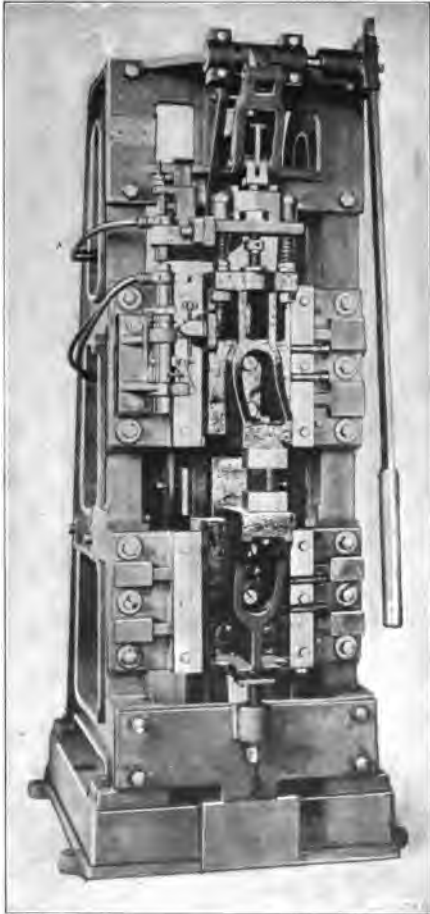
Type of Electric Welding Machine for Heavy Work
